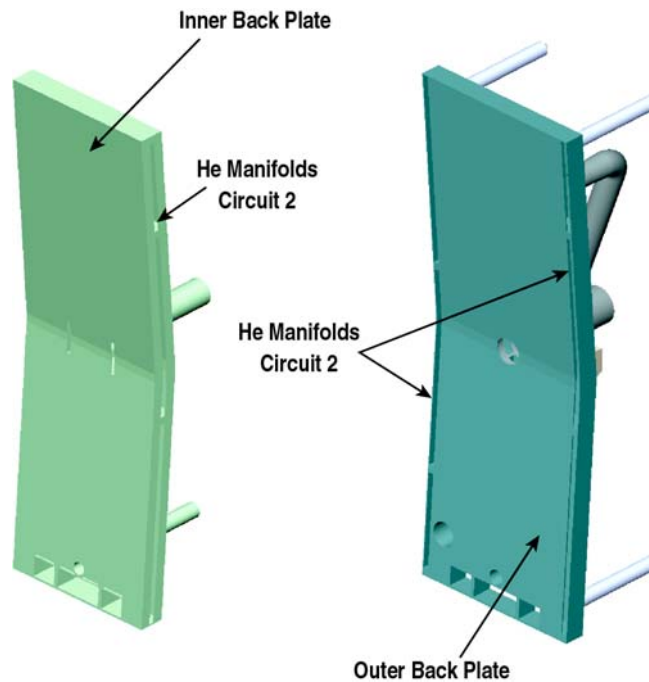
View showing the inner and outer back plates with the side He manifolds.
